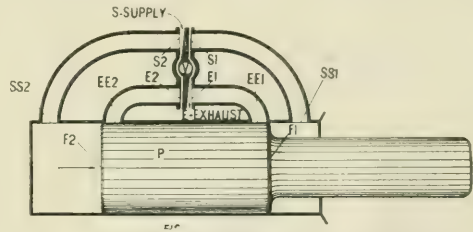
THE INGERSOLL-RAND BUTTERFLY OR FLAP VALVE.
